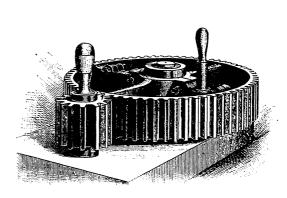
Device for Testing Accuracy of Hot Pressed Steel Pinion.
